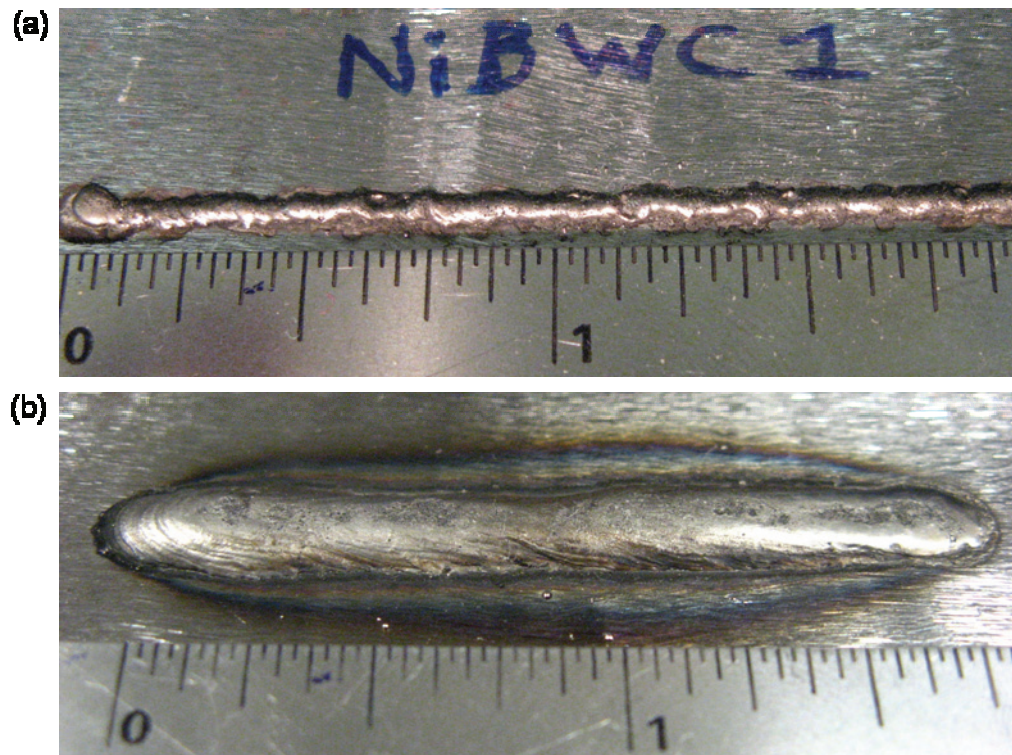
Beads produced with the CSC-MIG welding system using (a) low heat input parameters – sample A and (b) high heat input parameters – sample F.
